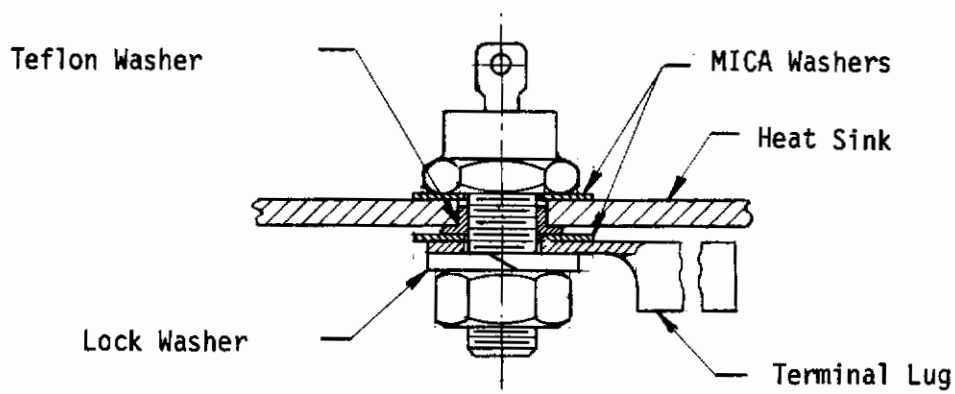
STUD MOUNTED RECTIFIER ASSEMBLY
